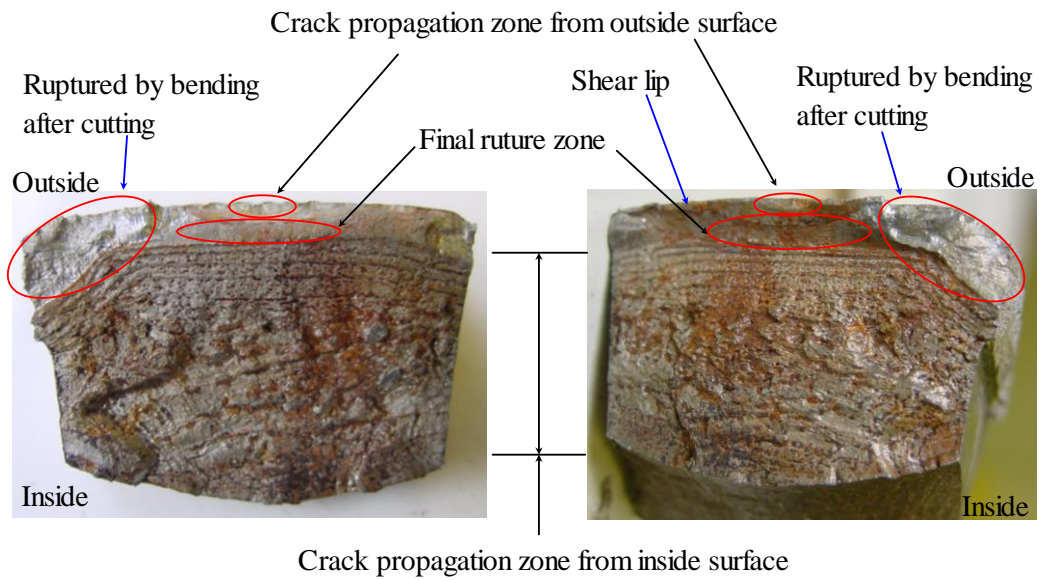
Fracture surface of seam weld (specimen LCF16N1)
